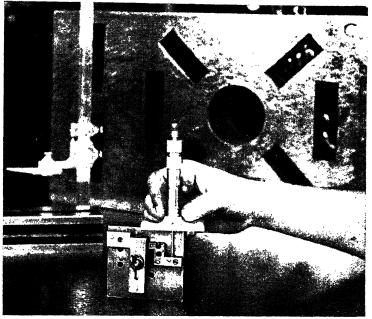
Depth gage. Micrometer depth gage checking the distance between two surfaces on a small fixture. This is one reason why it is desired in engineering drawings to have dimensions given from some reference edge or face. (Brown and Sharpe.)
